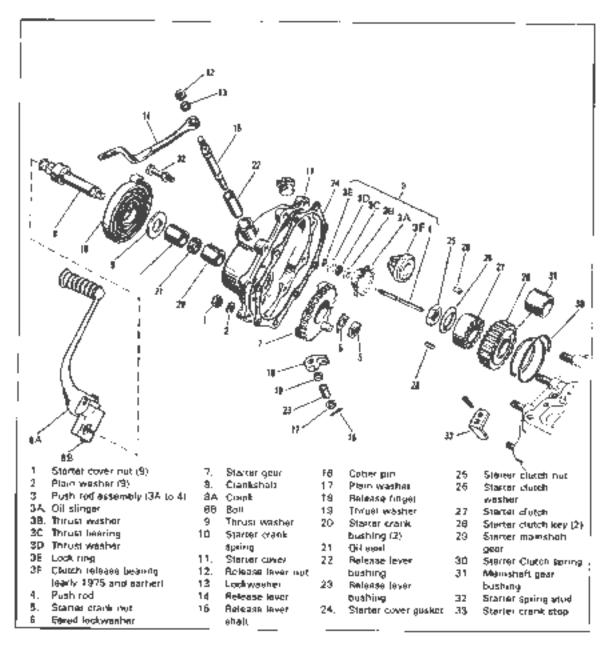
A. Kack Starter and Clurch Release Assembly - Espicoded View
